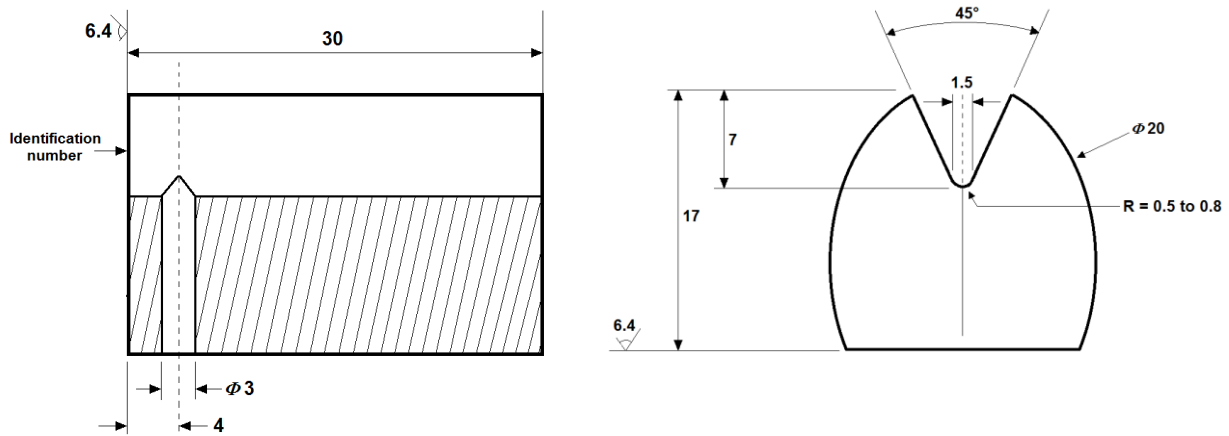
Standard V-type test piece used in this investigation to simulate the carburising of gears (all dimensions in mm).
